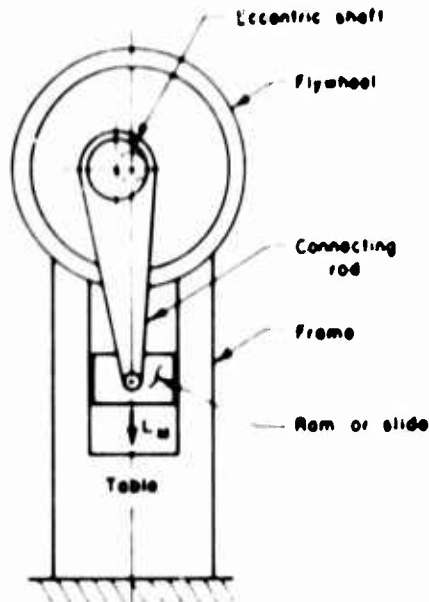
SCHEMATIC OF A MECHANICAL FORGING PRESS WITH ECCENTRIC DRIVE
